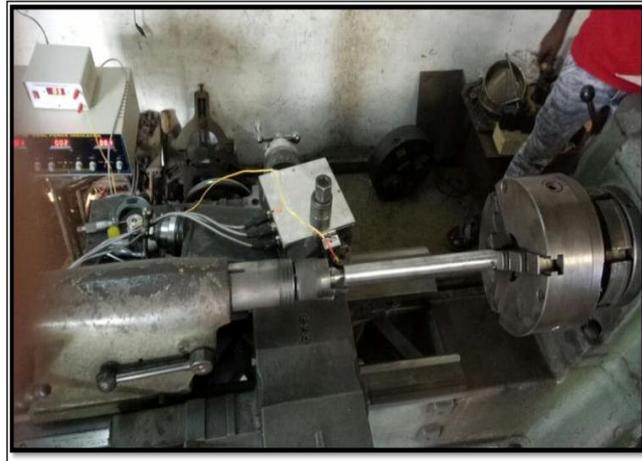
Lathe, thermocouple and lathe tool dynamometer experimental setup.
